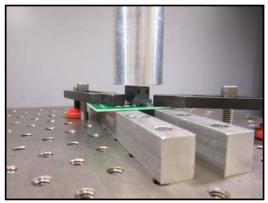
Typical Compliant Pin mounting force onto PCB test setup.
